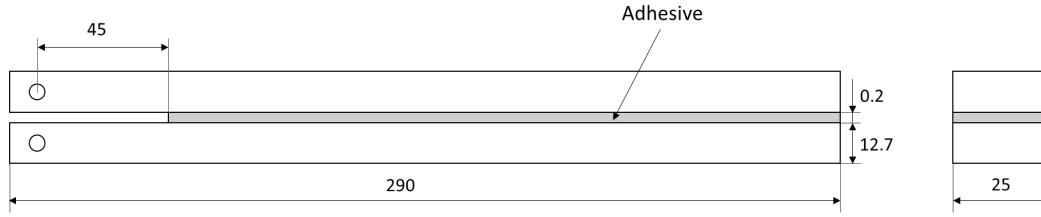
Representation of a DCB specimens' geometry, dimensions in millimeters.
